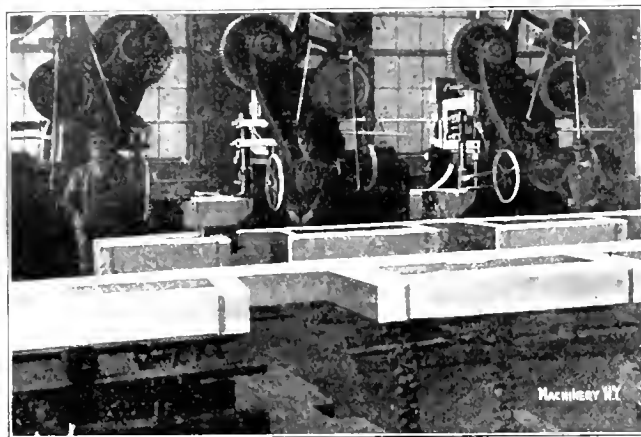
Three-head Slotter which machines from Two to Four Locomotive Frames simultaneously
